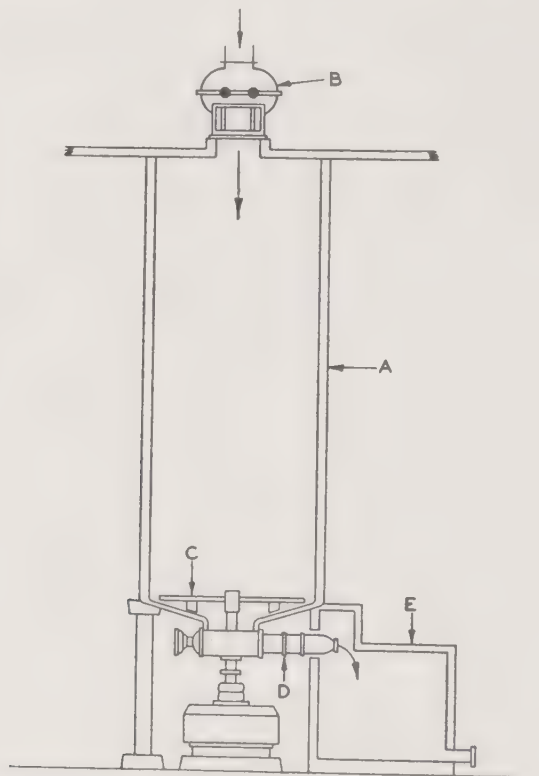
Thorne-type continuous bleacher: (A) tower; (B) double-shaft mixer; (C) scraper; (D) twin discharge screw; (E) dilution chest. Courtesy of Improved Paper Machinery Corp., Nashua, N. H.
